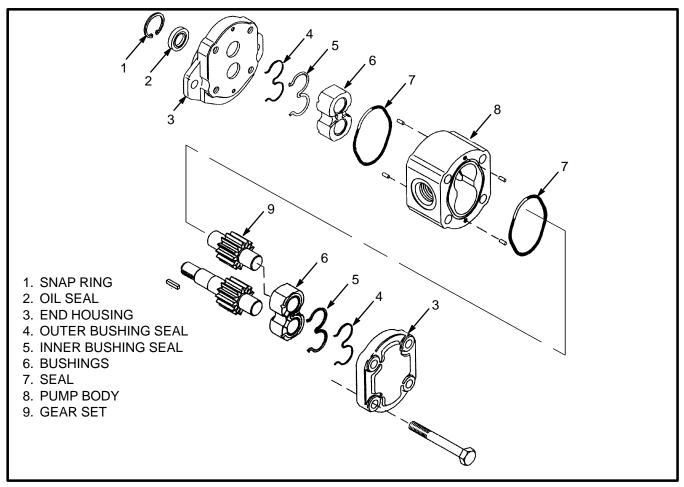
HYDRAULIC GEAR PUMP ASSEMBLY
